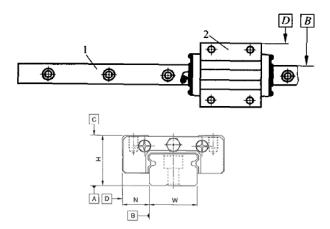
Mounting Surface and Positioning Surface of the Guide Rail
